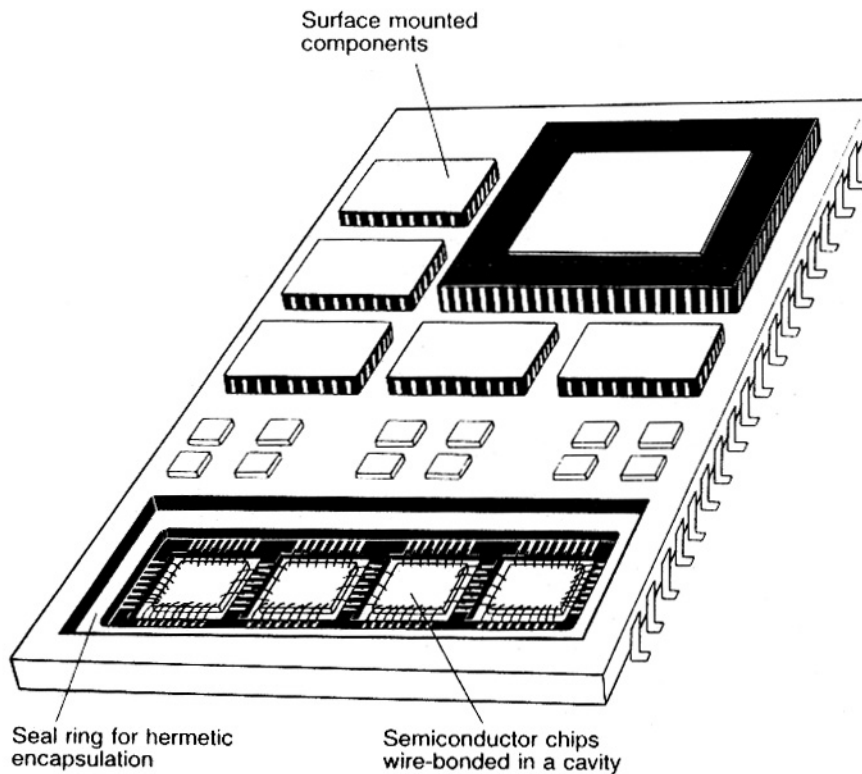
With the multilayer ceramic module it is possible to combine hermetically sealed, wirebonded Si chips in a cavity with lid, soldered, surface mounted packaged chips, and soldered passive components.
